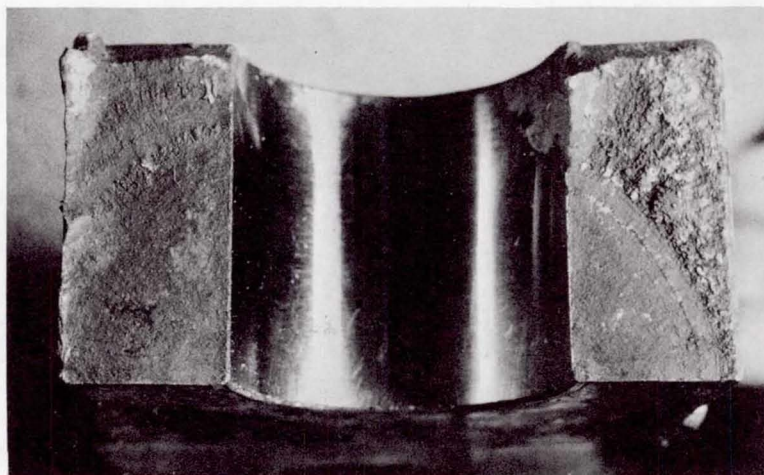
Appearance of the fracture in the failed fitting shown in figure 8. X 2.
